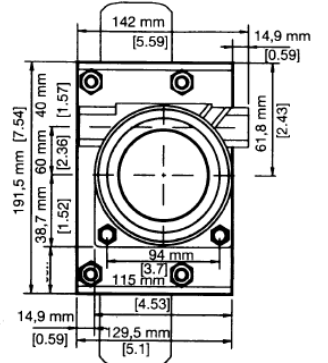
STT350 Transmitter and Optional Flameproof Housing Dimensions –reference only – mm (inches)
